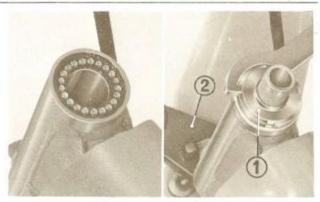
(1) Steering head bearing adjusting nut (2) Steering stem
